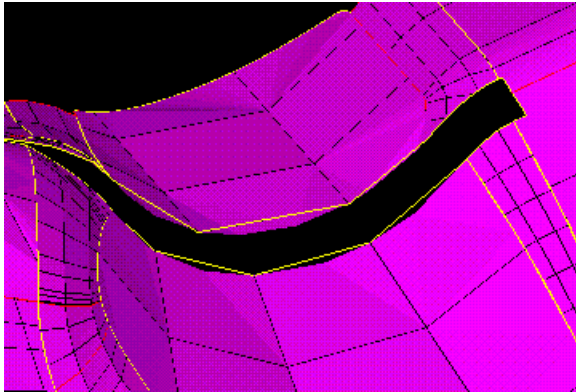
After Remove Holes \(p. 14\)](#) shows the geometry after the Remove Holes operation is completed for one of the holes. The existing surface is modified by removing the trim definition.
